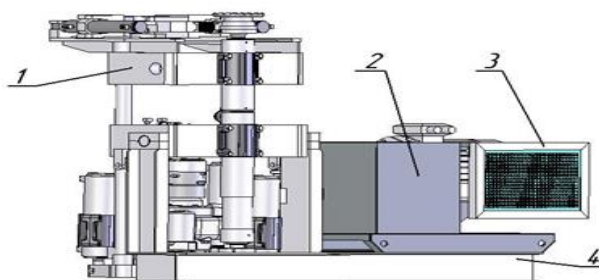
Drilling rig BGA 2V: 1—drilling assembly; 2—oil station; 3—radiator; 4—frame.
